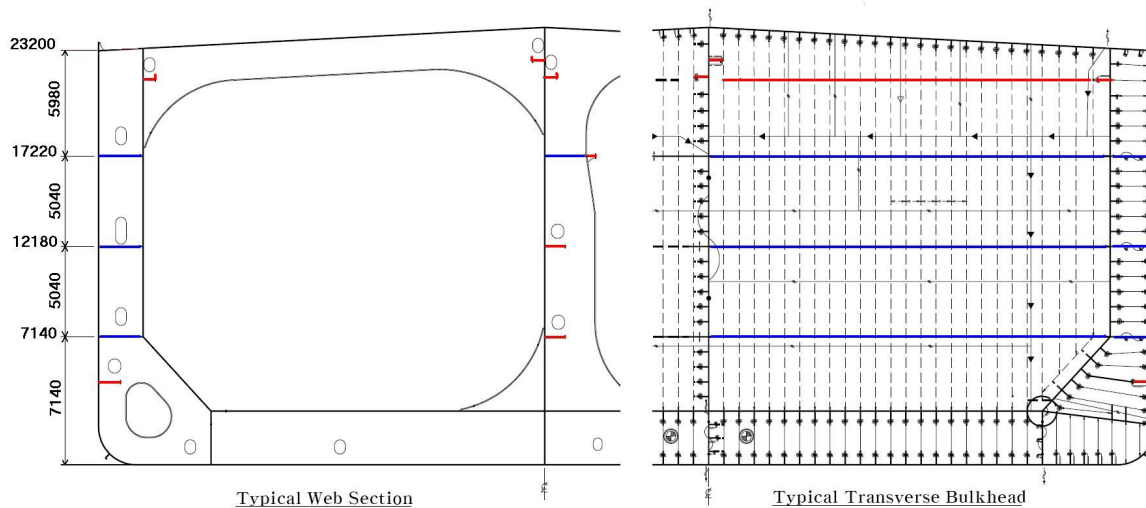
Typical Web Section & Bulkhead Section of Suezmax Tanker
